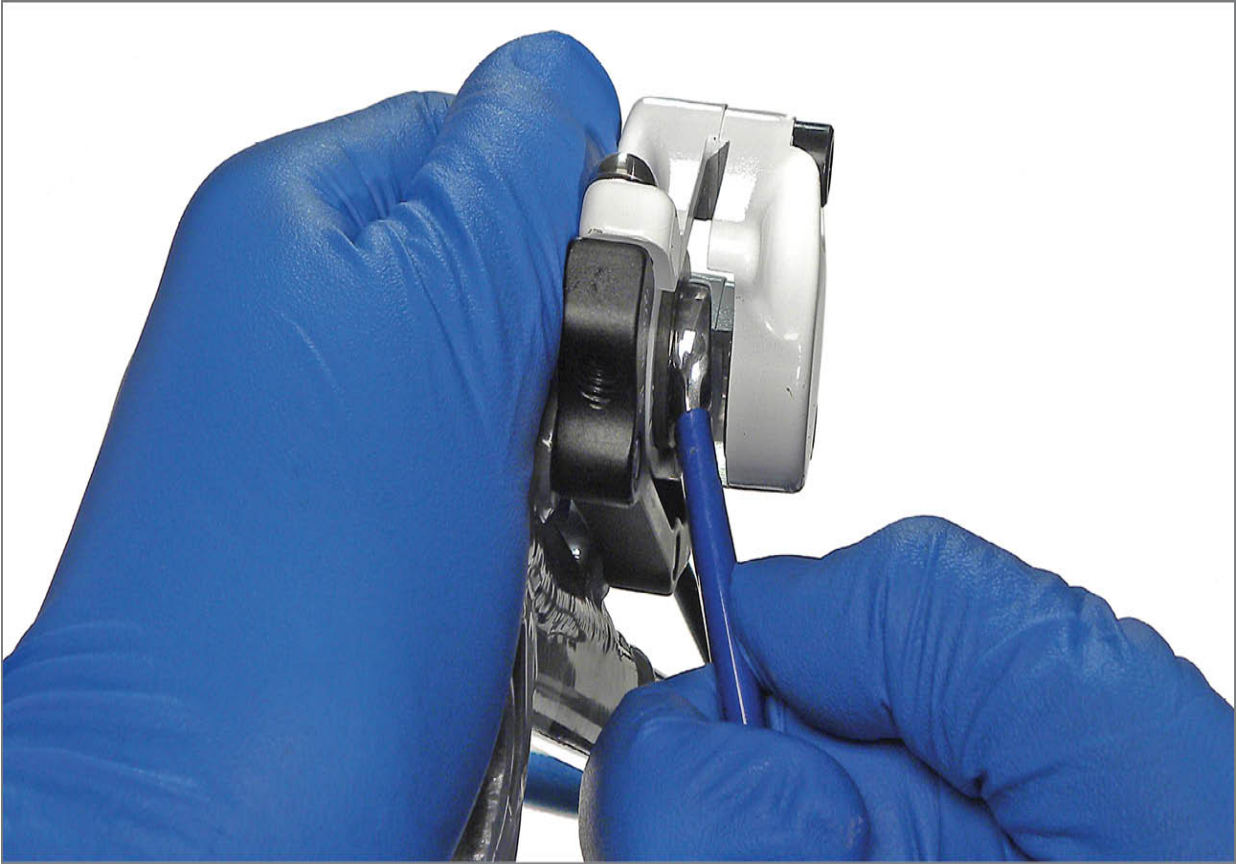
Push piston back using box end of wrench placed over piston stud
